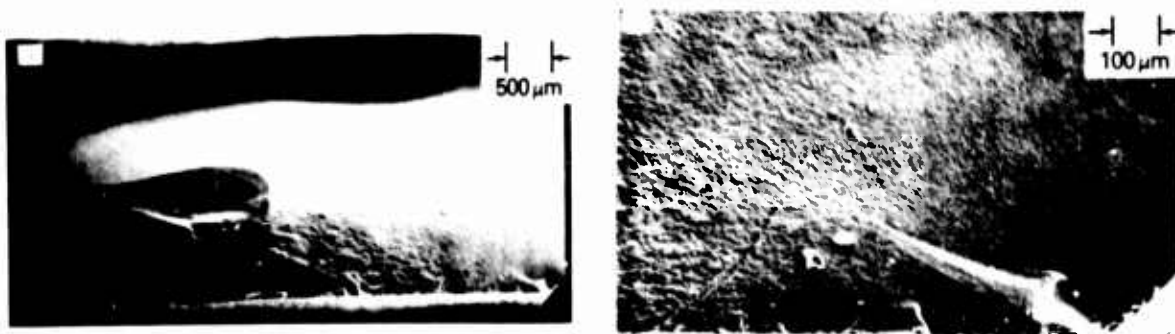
Failure of hot pressed MgF_2 infrared optical material from a machining flaw located at the corner. The approximate semi-circular flaw is located at the intersection of the beveled edge and the tensile surface in the lower right-hand corner of both (a) and (b). The elongated feature extending towards the upper left corner from this flaw is due to the non-planar character of the flaw and its subsequent effect of the fracture first occurring on two planes which subsequently join together.
